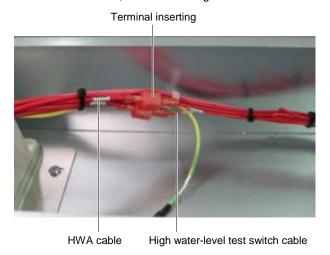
Inserting cable terminal of high water-level test cable into HWA cable terminal
